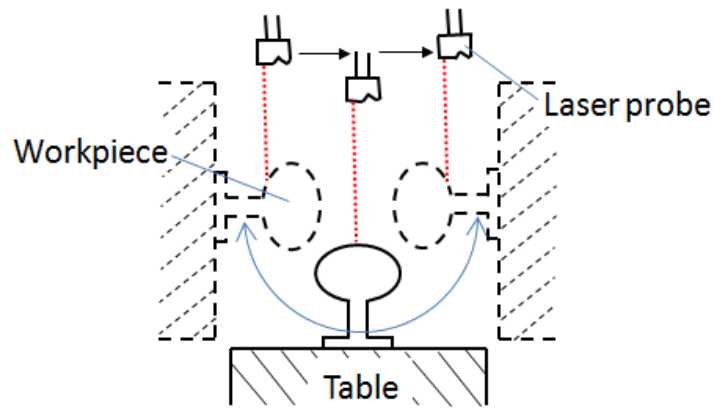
On-machine measurement with continuously tilting the workpiece.
